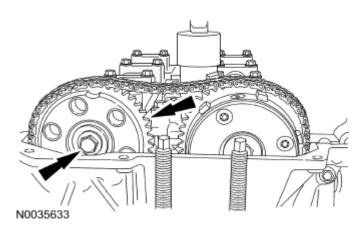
Locating Timing Chain On Intake Camshaft Drive Gear Courtesy of FORD MOTOR CO.
